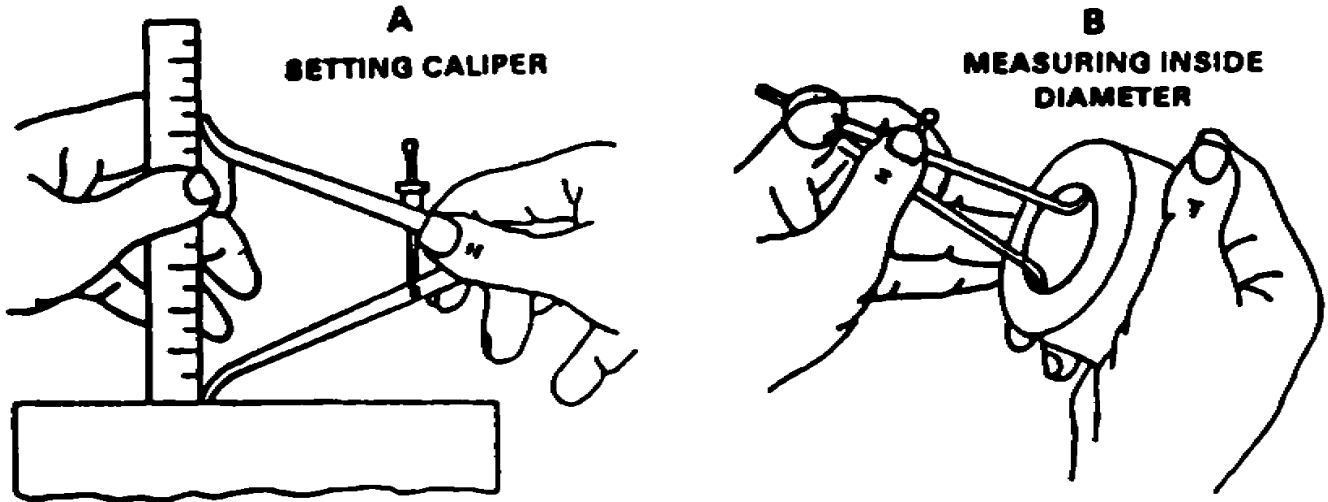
SETTING AND USING INSIDE CALIPERS (A AND B)
